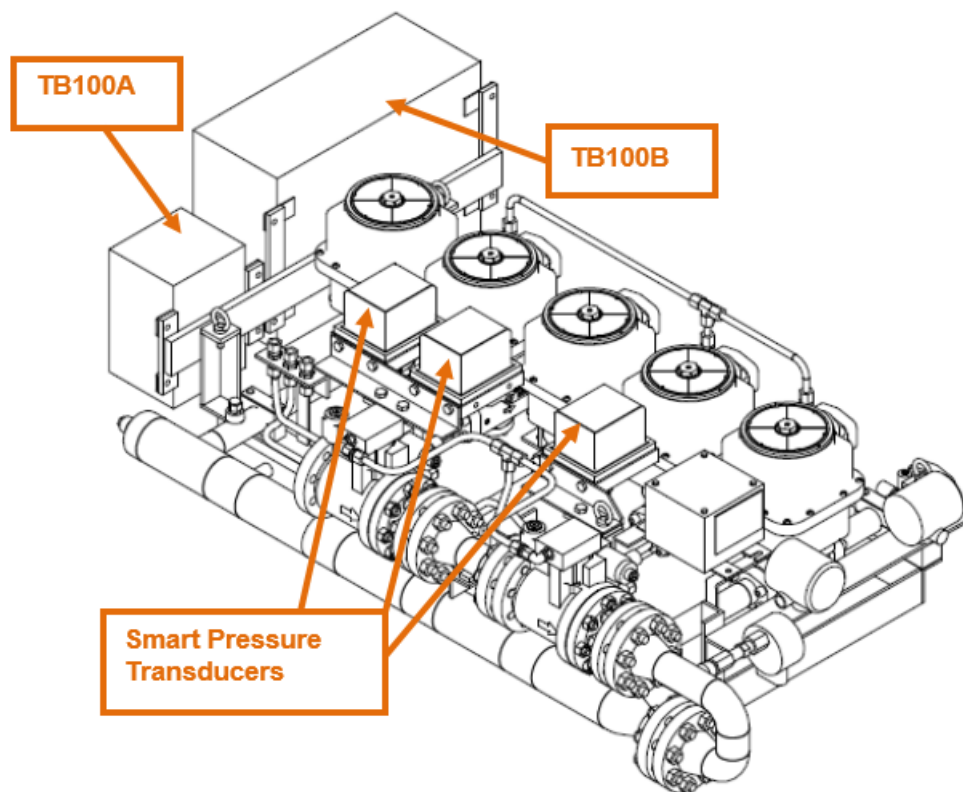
GE Oil & Gas PGT25+G4 DLE Skid
